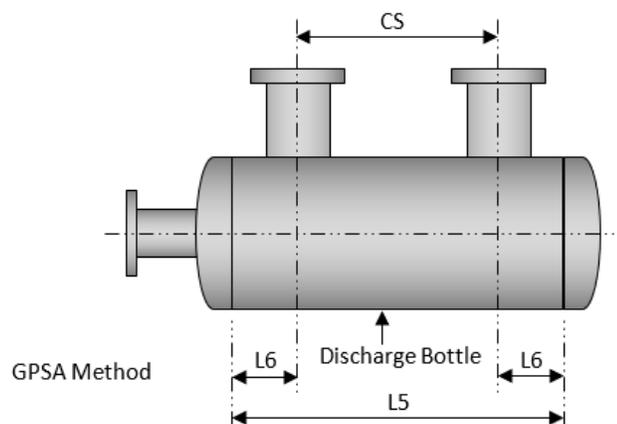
Layout for GPSA two-cylinder, single-bottle sizing.
